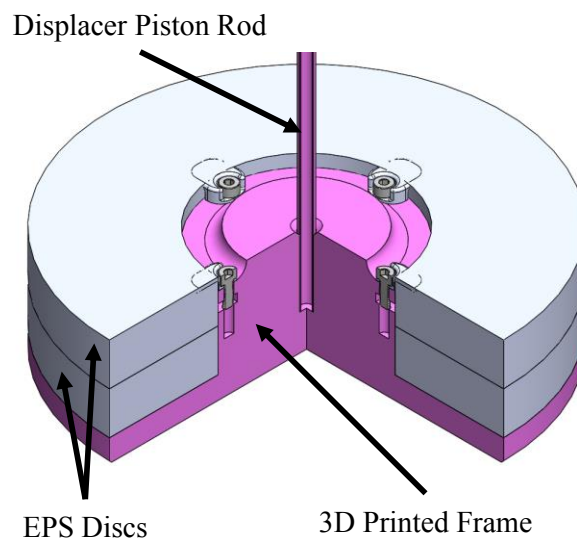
Section view of the solid model of the displacer piston used by the Mark 1.
